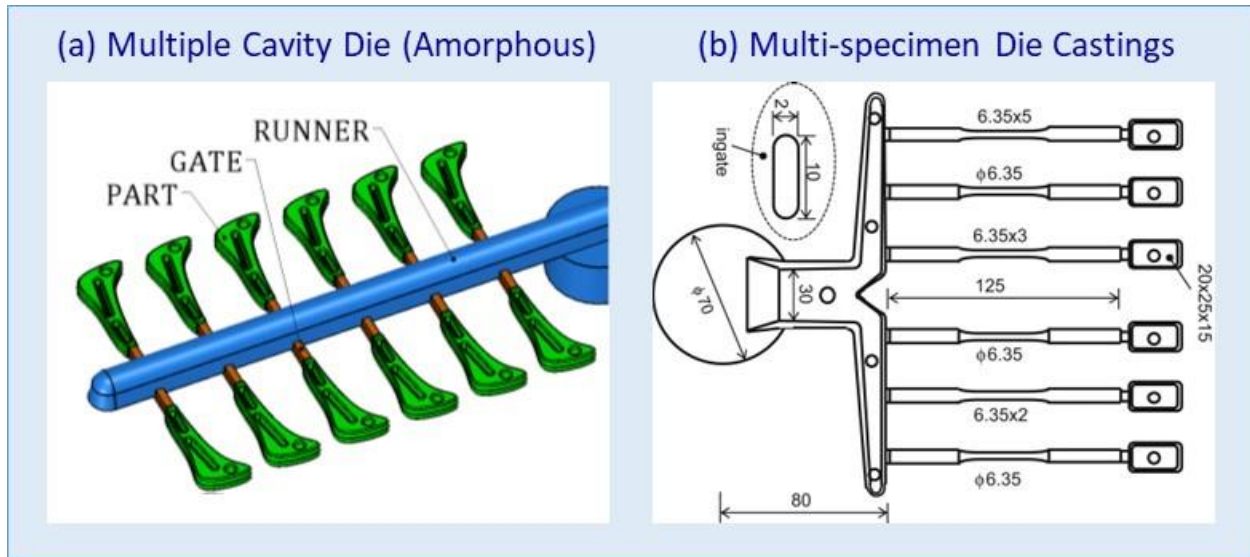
Opportunity to cast groups of BMG test specimens close to ASTM dimensions: (a), multi-cavity dies already used in the amorphous castings industry [ref. 23]; (b), multiples of tensile specimens already produced by die casting [ref. 24].
